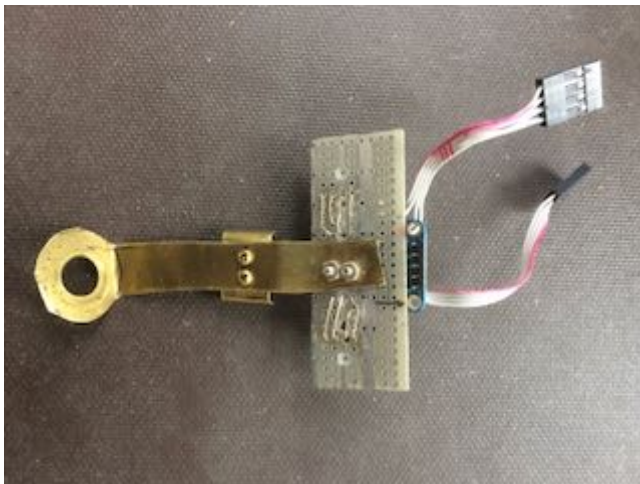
Rear side of the lamp and speaker assembly. Note that the perf board is connected to the bracket by two 2-56 bolts.
